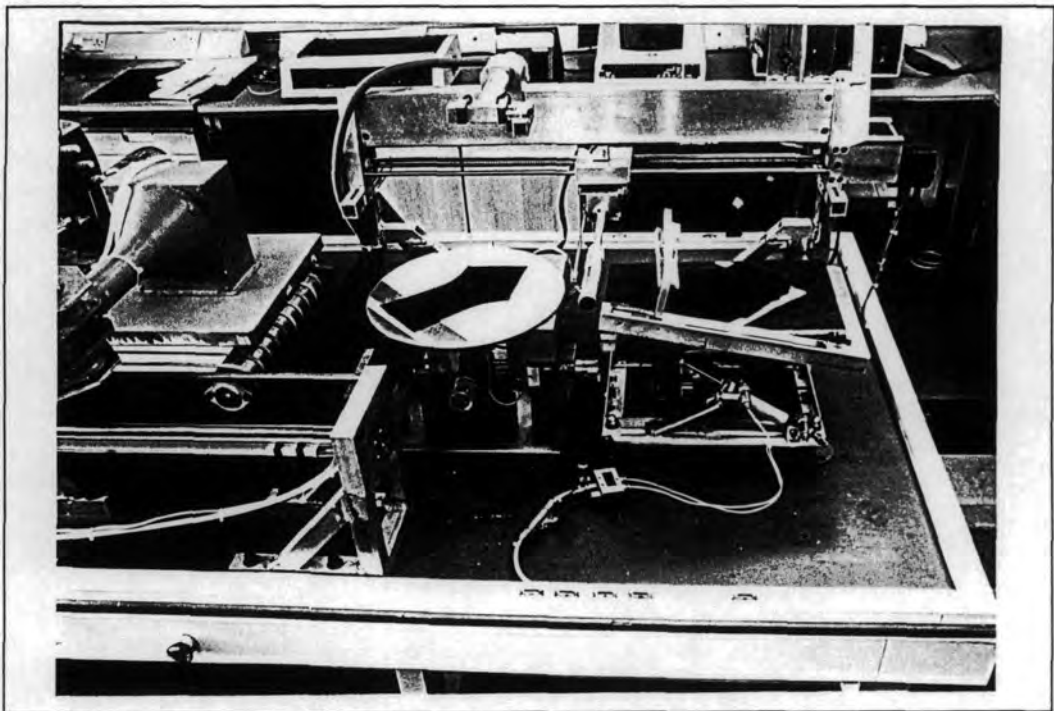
The assembly cell de-stacking unit and alignment table.
